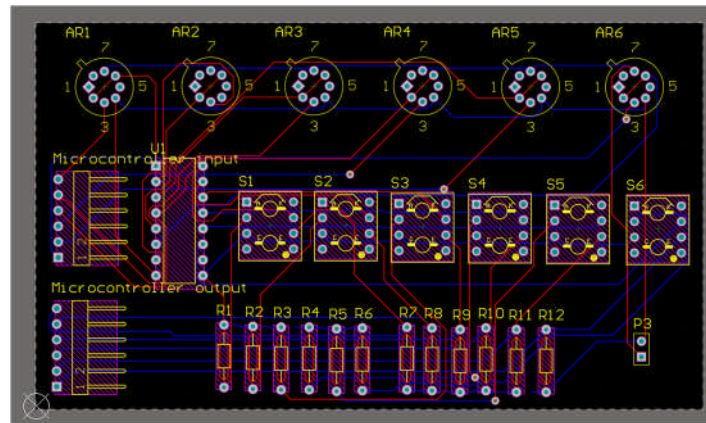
PCB routing diagram showing the placement of the relevant components and how the tracks will be etched on the PCB
